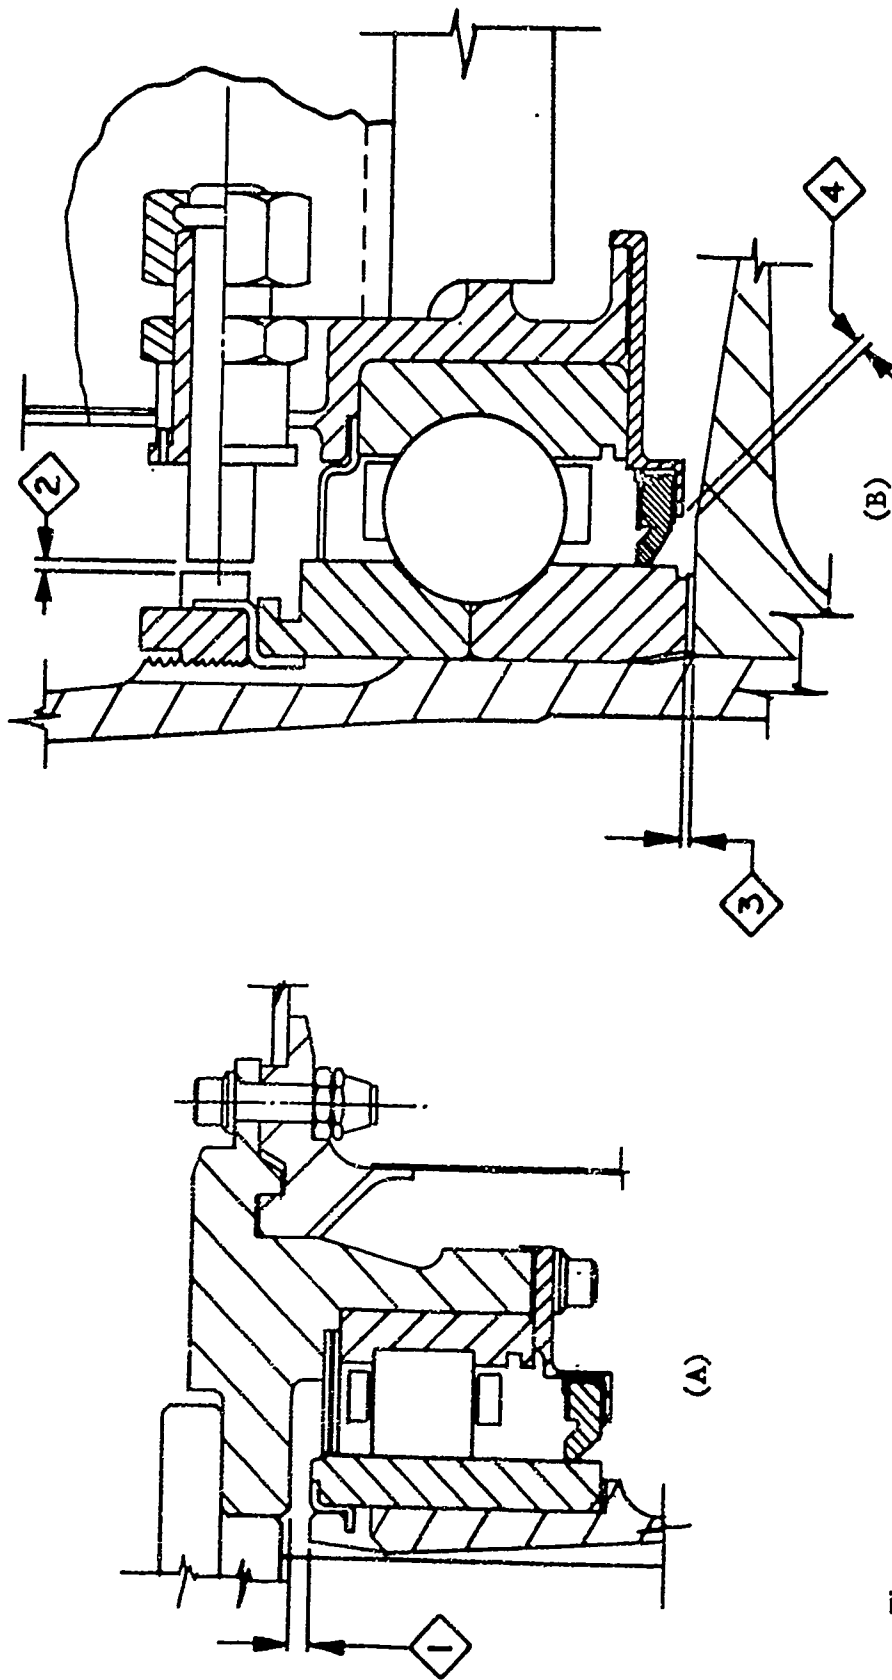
A Reference Sketch for Final Inspection of Assembly
